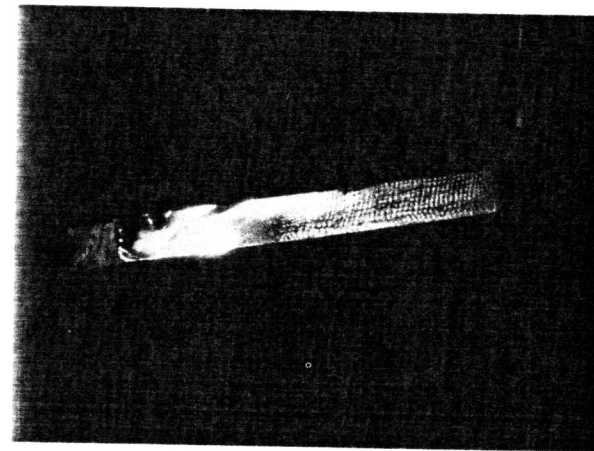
Orientation 3. Optical Micrograph of the Fracture Surface. Specimen Dimensions 20 mm x 3 mm
